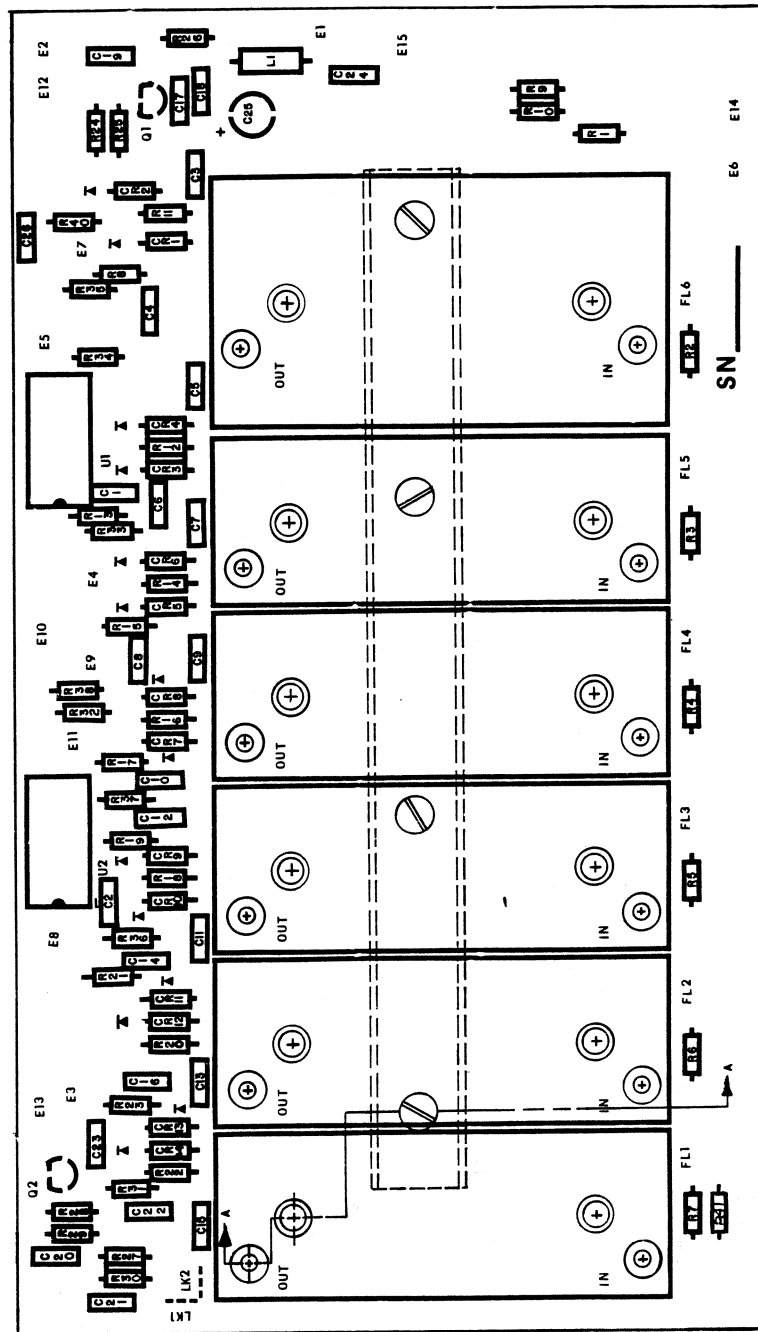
B. IF Filter A4, Circuit Card Assembly
